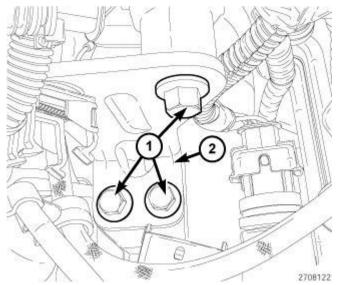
GENERATOR BRACKET SUPPORT & BOLTS Courtesy of CHRYSLER LLC
